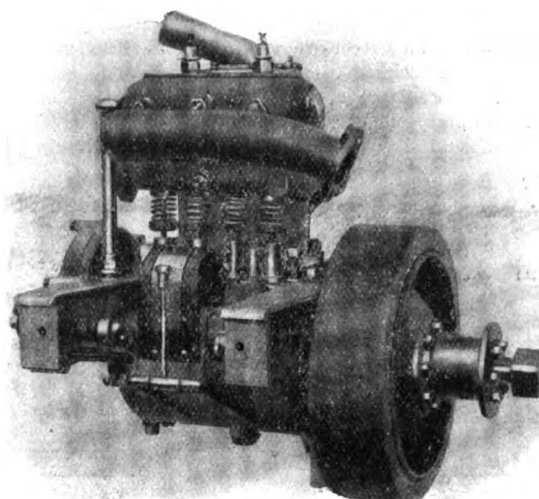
Valve Side of Gregoire 9-h.p. Two-Cylinder Engine.
